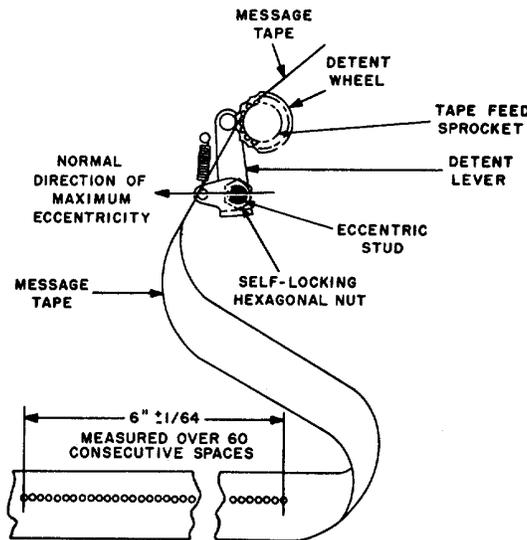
Feed hole spacing and detent lever alignment adjustment.
